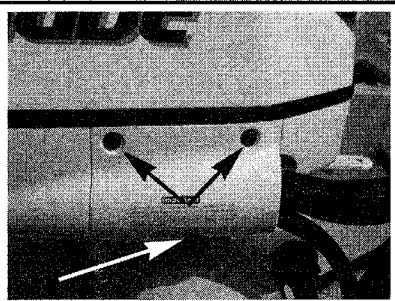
There are 3 screws holding the cable entry cover to the motor...
